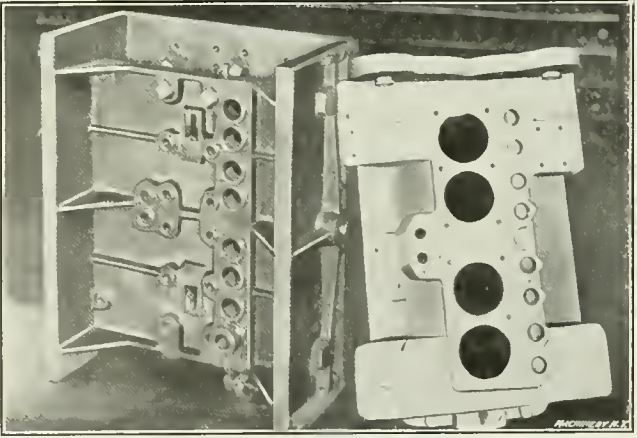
Drilling and Reaming Jig for Upper Crank Case, also showing Model Drilling and Reamer Rack in the Background
